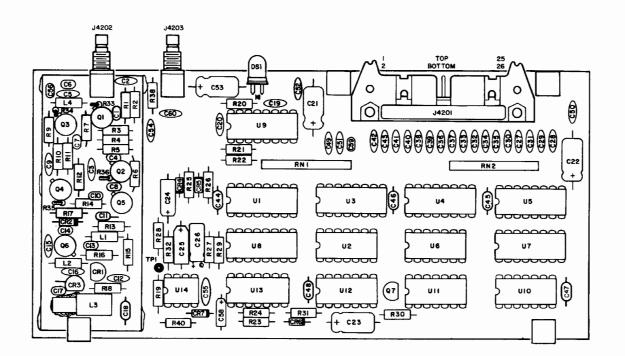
High/Low Pass Filter Assembly (0000-5010-700-B)
